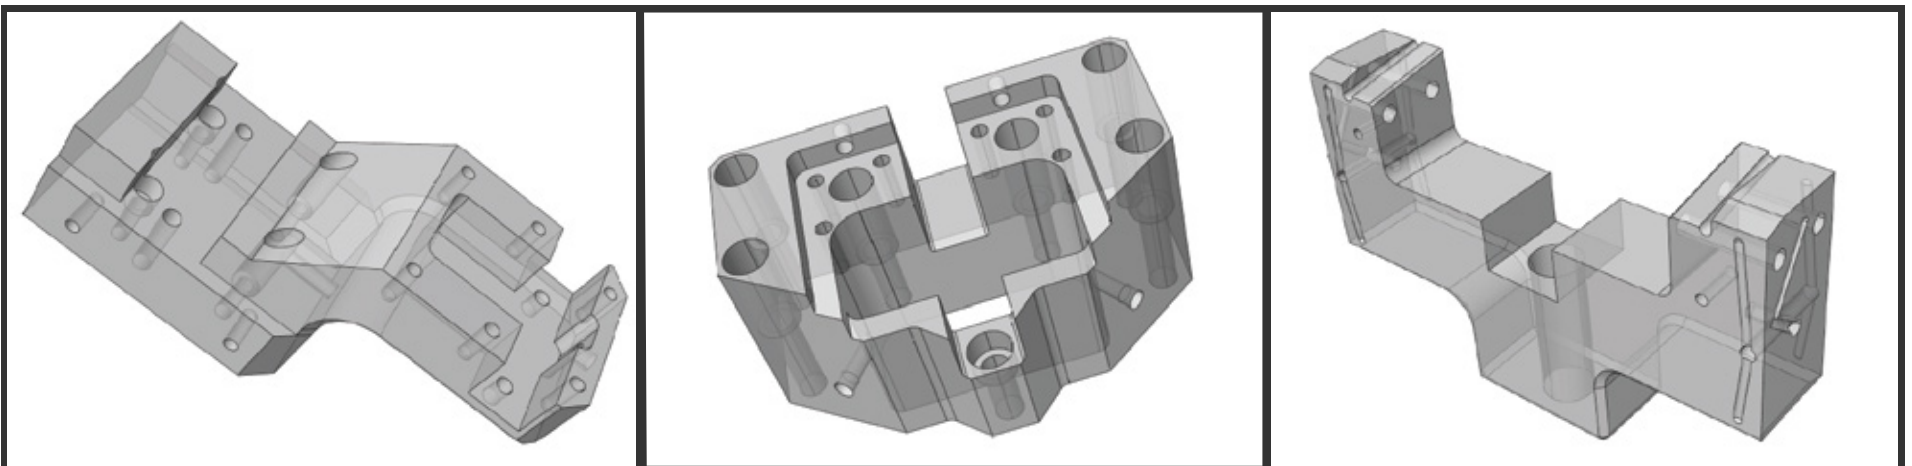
T-FAY TECH machines precision components for tool & die and industrial machinery applications. Here are three typical examples of the type of machined components from T-FAY TECH.
